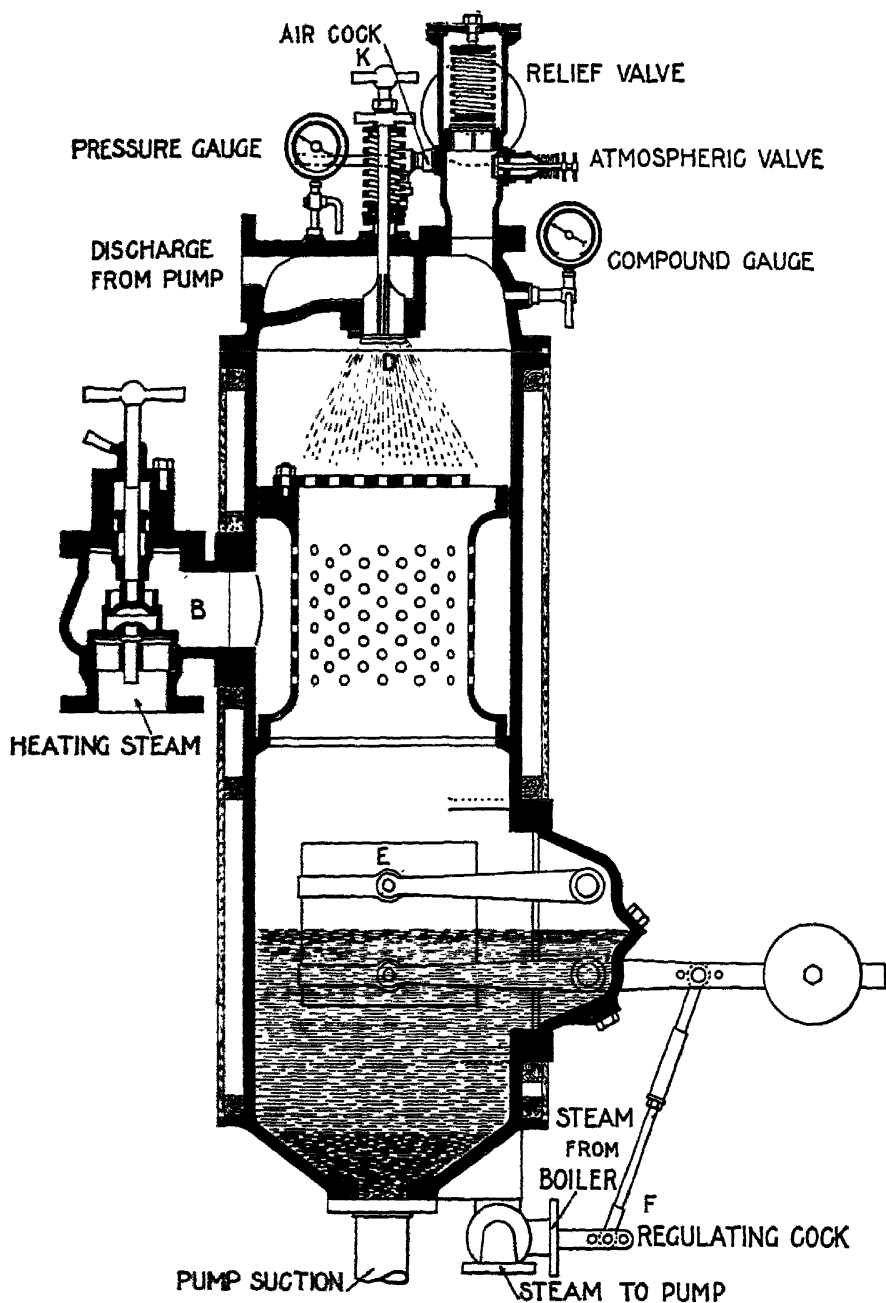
WEIR DIRECT CONTACT FEED-WATER HEATER AND AUTOMATIC REGULATING GEAR.
